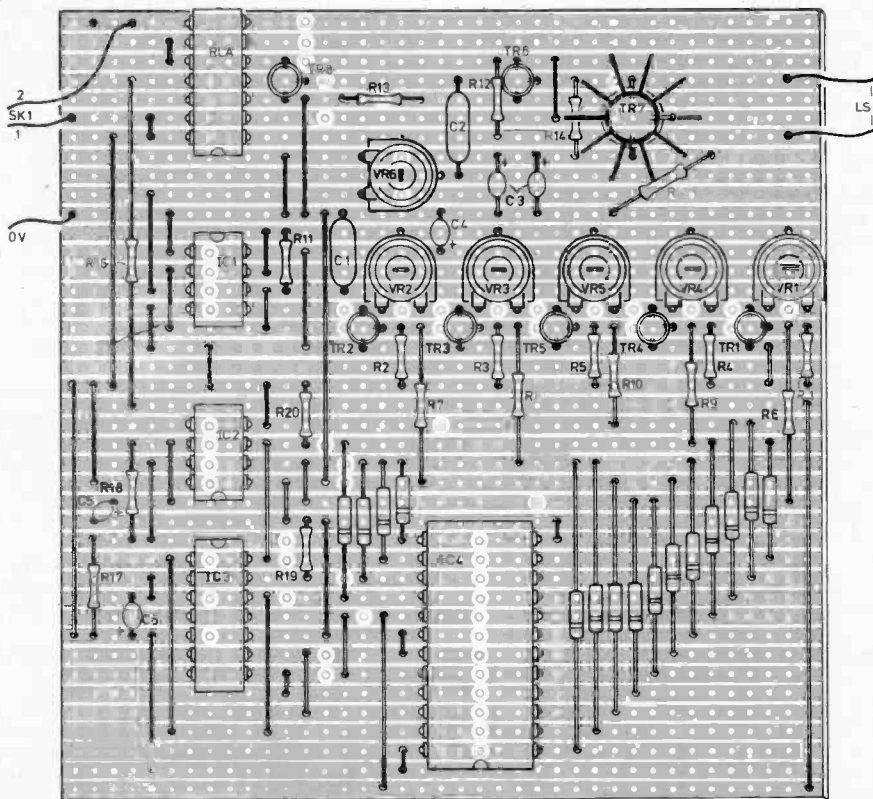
Veroboard component layout and cutting details for the prototype electronic doorbell
